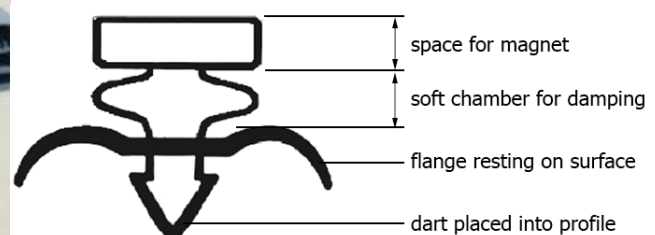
Variety of refrigerator gaskets (www.easterngasket.com) Figure 123 Typical refrigerator gasket design (www.dgk-gmbh.com)
